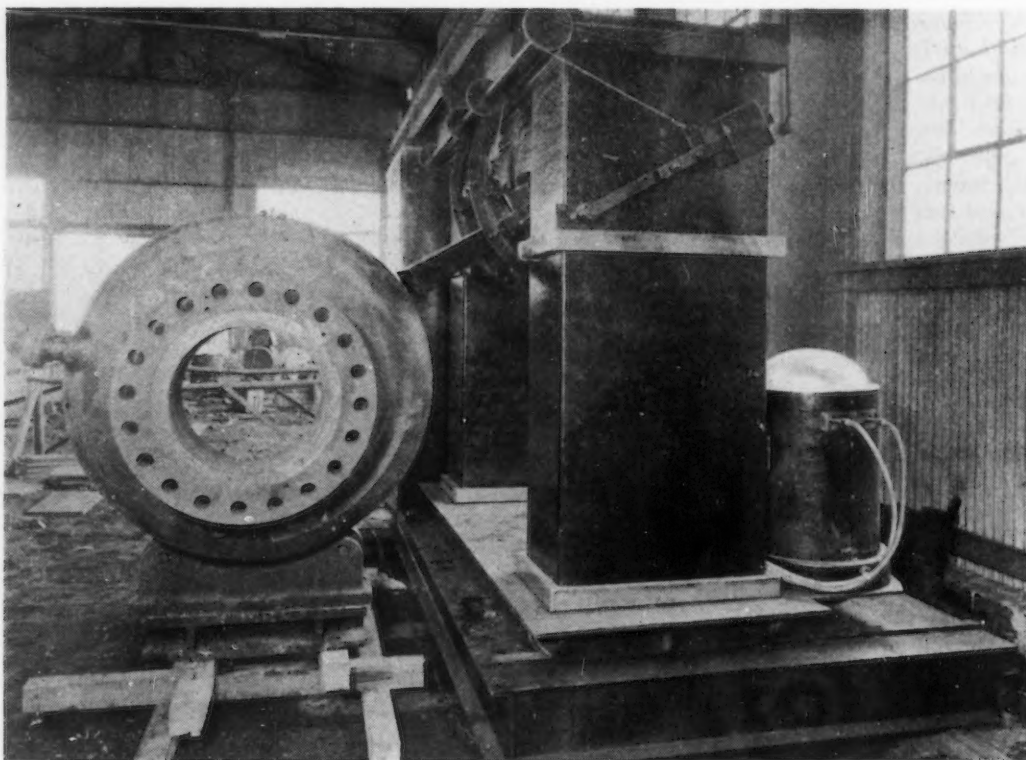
A 400-kv. industrial X-ray machine capable of penetrating 5 in. of steel. Photo courtesy of Kelley-Koett Mfg. Co., Inc.
